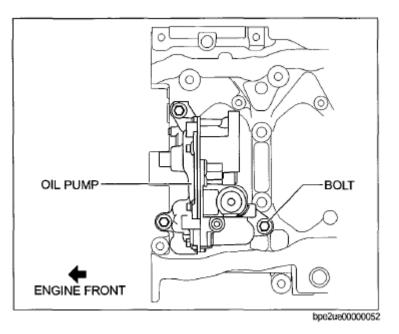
Identifying Oil Pump Assembly And Mounting Bolt
